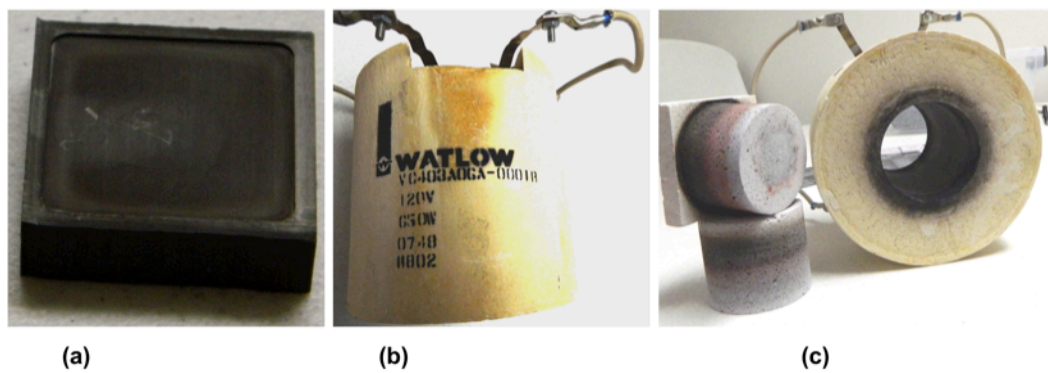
Components used for sintering copper blocks, showing: (a) graphite mold (b) bell jar heater furnace and (c) ceramic end plugs for furnace.
